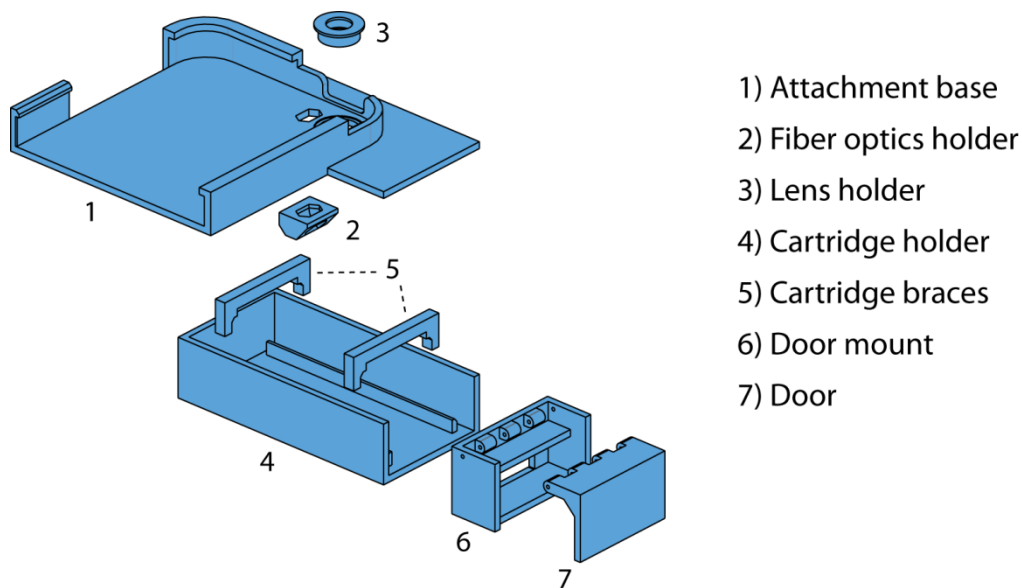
Exploded view of the 3D printed parts in the iPhone 5s LFA reader.
